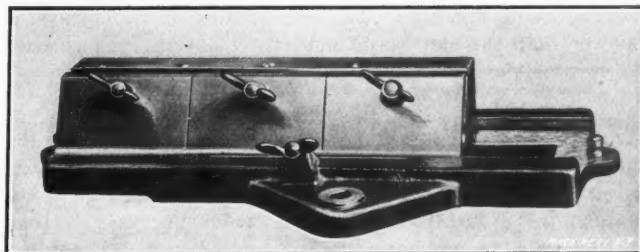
Fixture used on Gorton Engraving Machine having Simple Clamps
